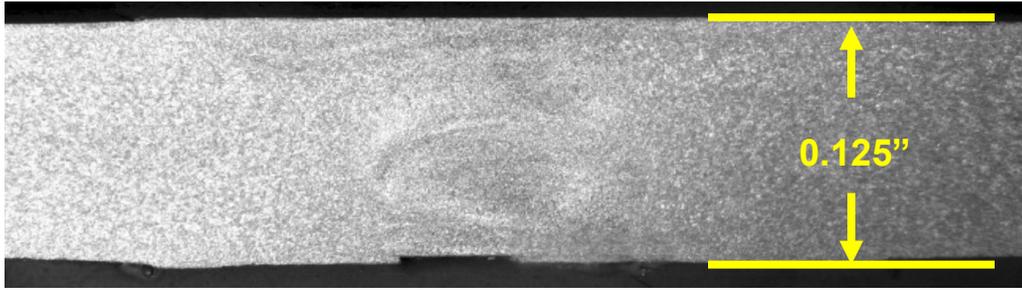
Macrostructure of double pass butt weld Al5456-H111 - 0.125"
